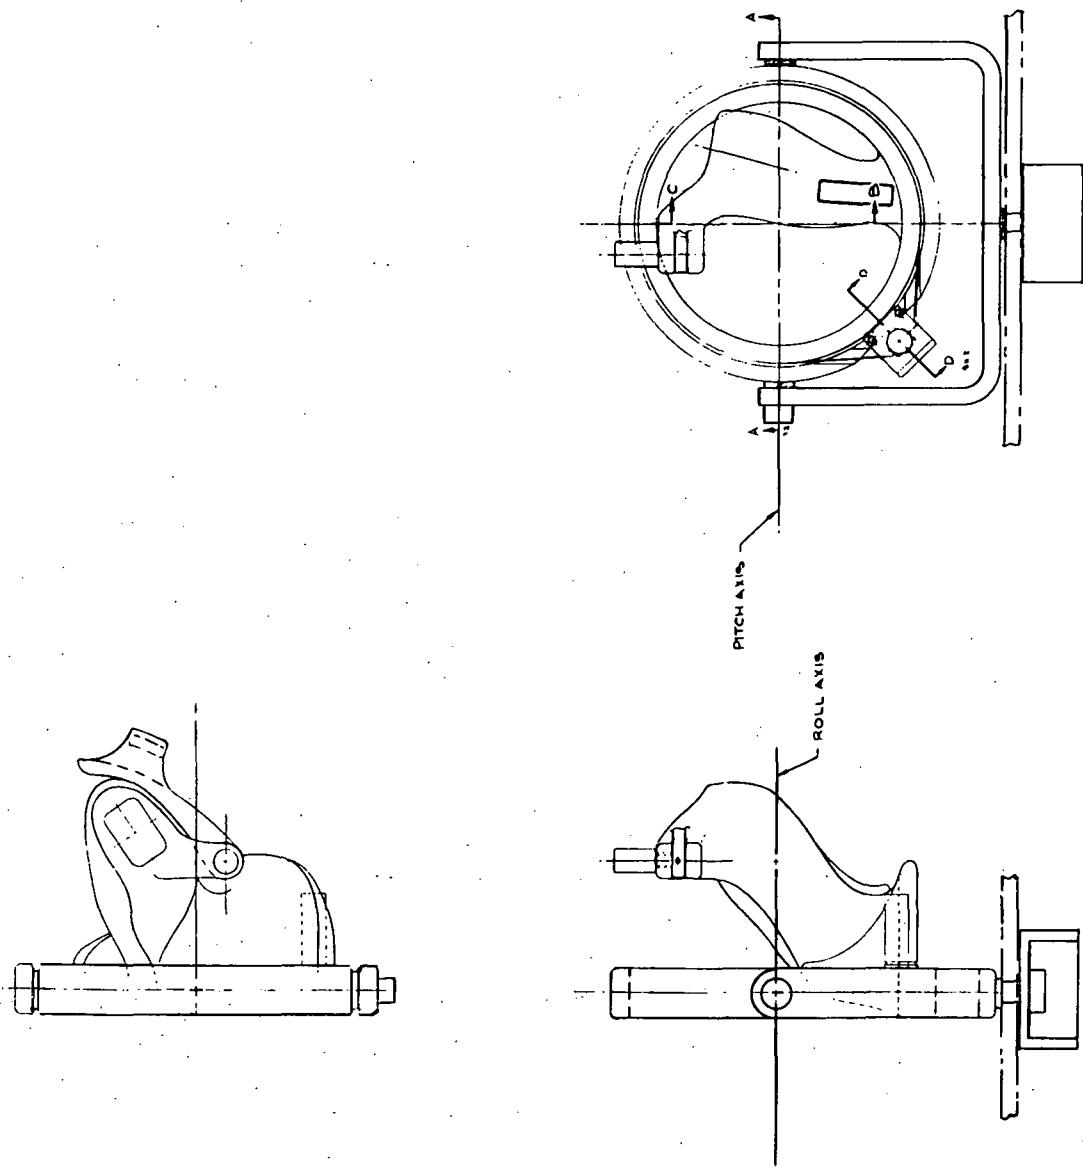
Terminal Pointer Hand Controller – Modified Configuration Layout
